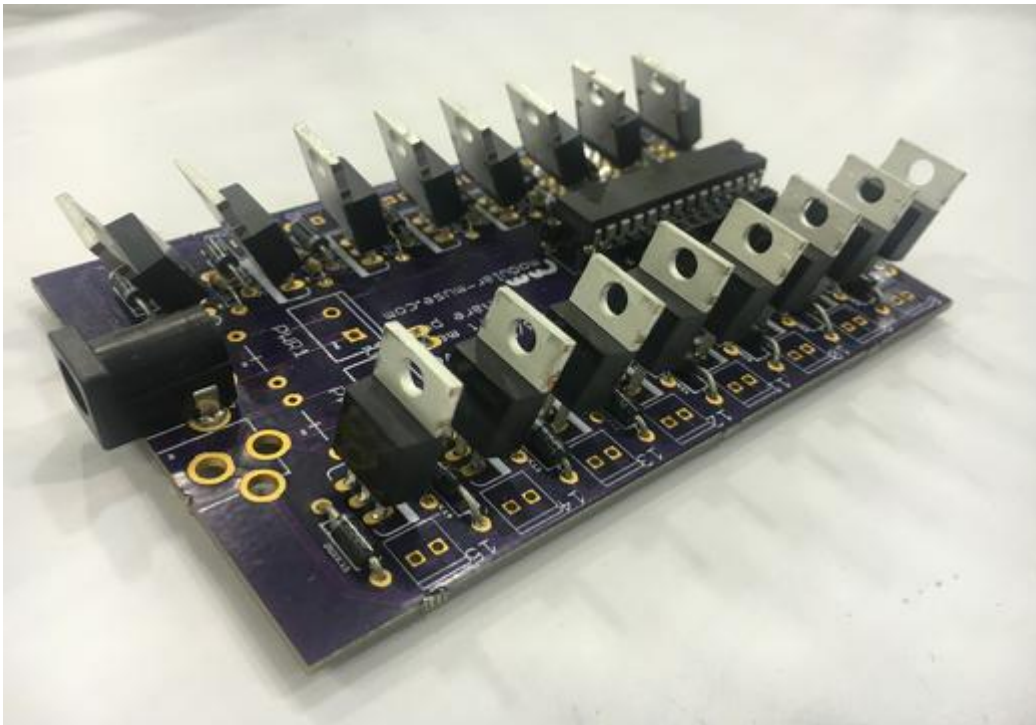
The MMMDx16, chainable 16 channel motor driver board
